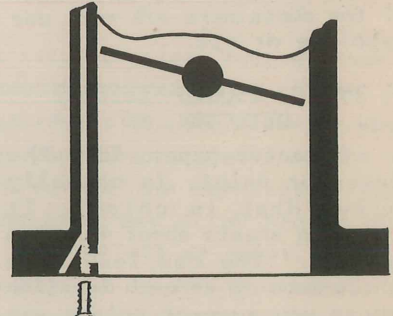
Don't be afraid of a double outlet to the flange - just screw in a hollow screw as above (the gasket will block off the angled outlet).
